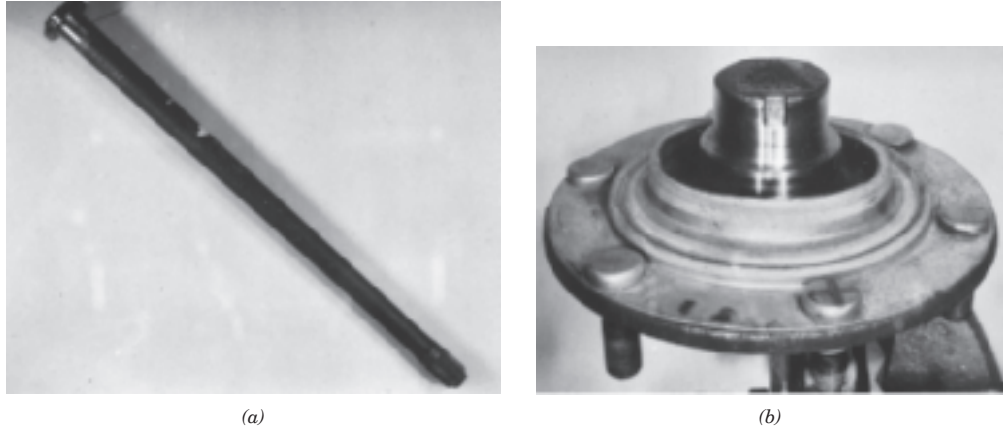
(a) Photograph of one section of the failed axle. (b) Photograph showing wheel mounting flange and stub end of failed axle.
